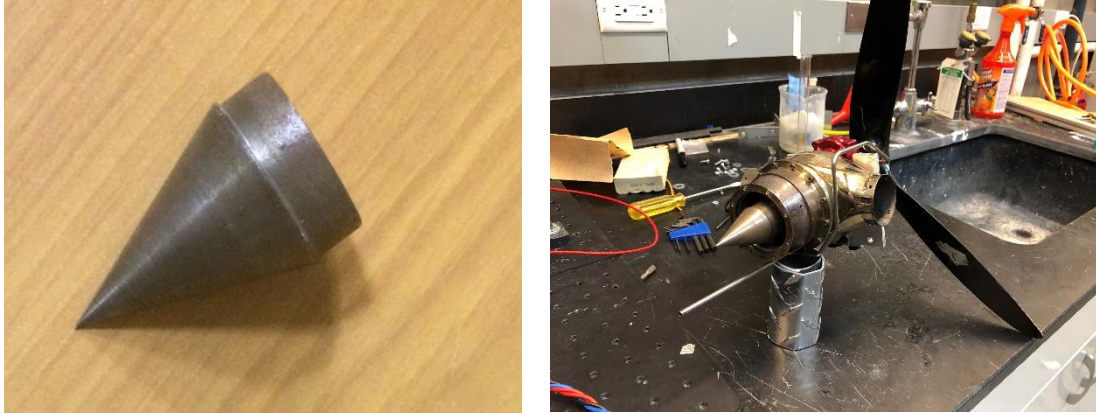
Stainless Steel Cone for Aft Propeller Assembly (left) and Cone in Hub of Aft Propeller Assembly (right).
